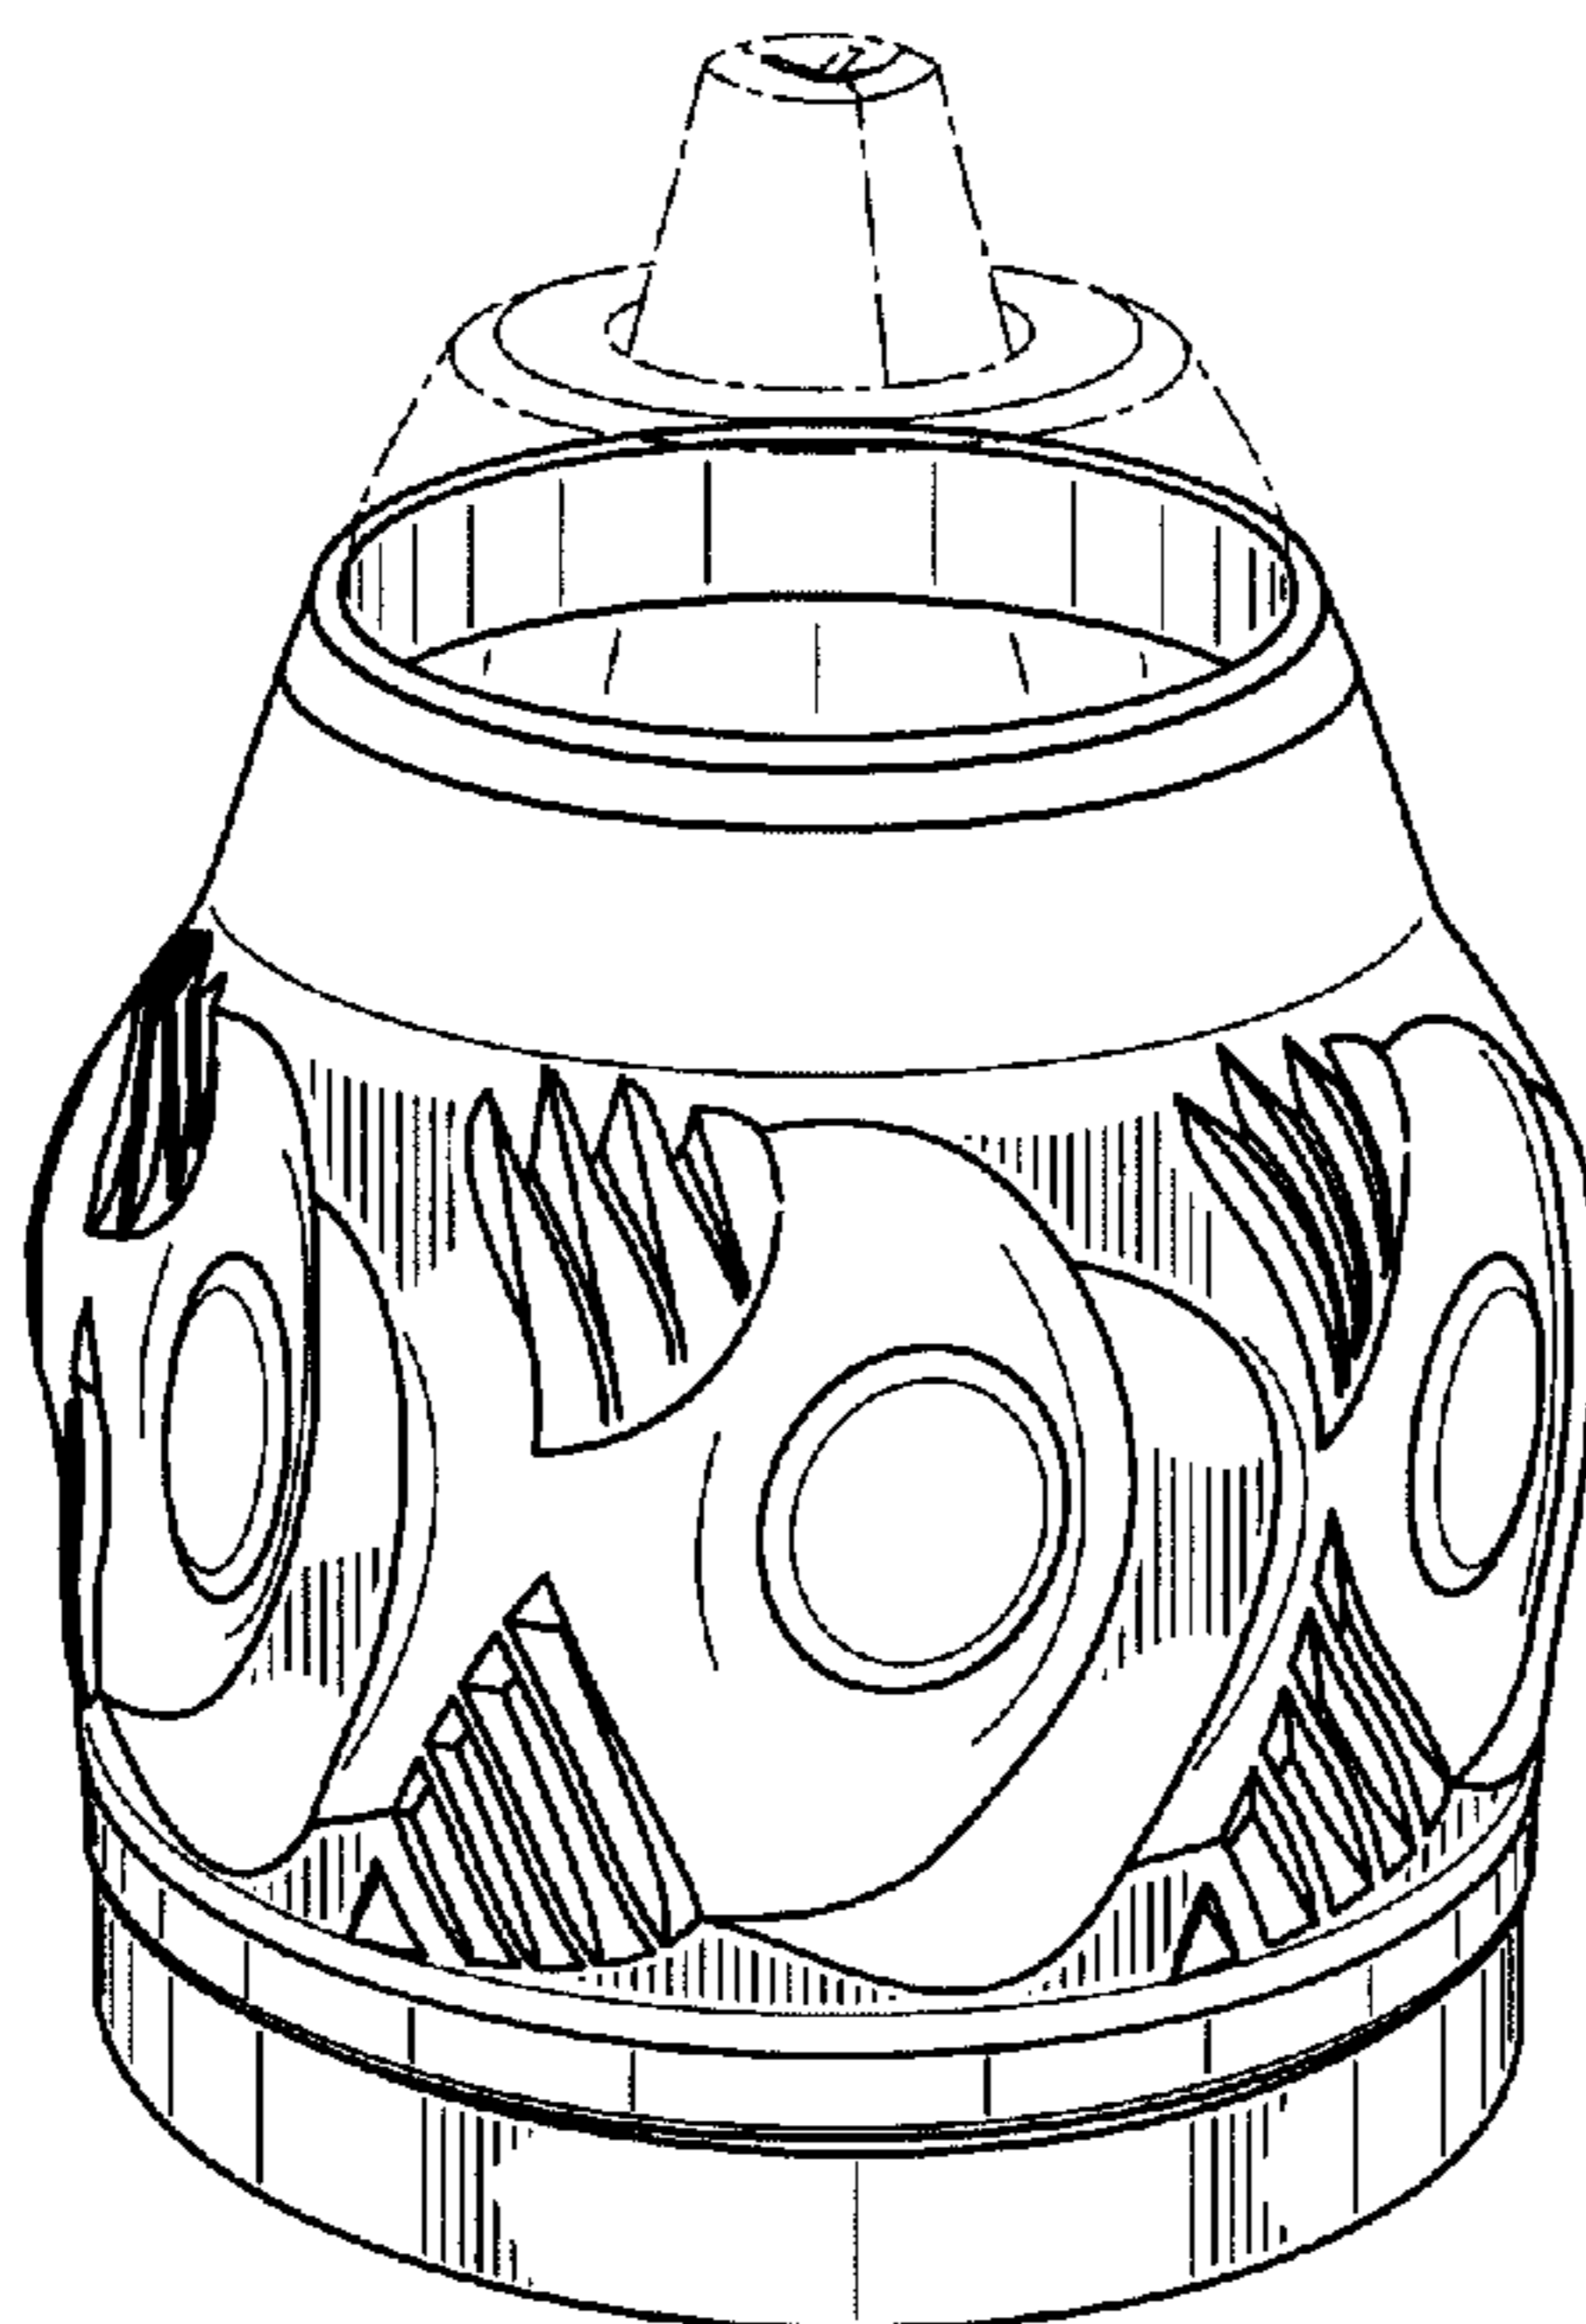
is a right side view of the drill chuck sleeve shown in FIG. 1;
